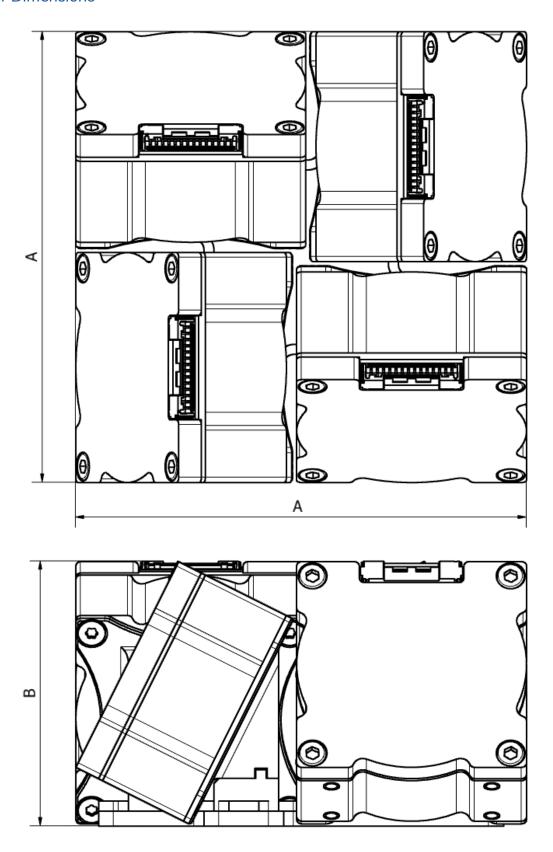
Indicative Dimensions of a CubeWheel Pyramid Assembly
